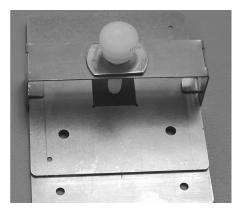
Rework Fixture and Rework Stencil for 176L CSP
